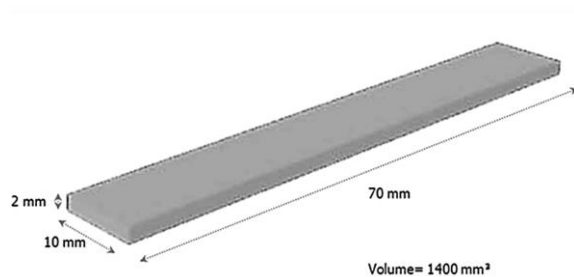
Sketch illustrating the dimensions of the samples applied in the material's testing
